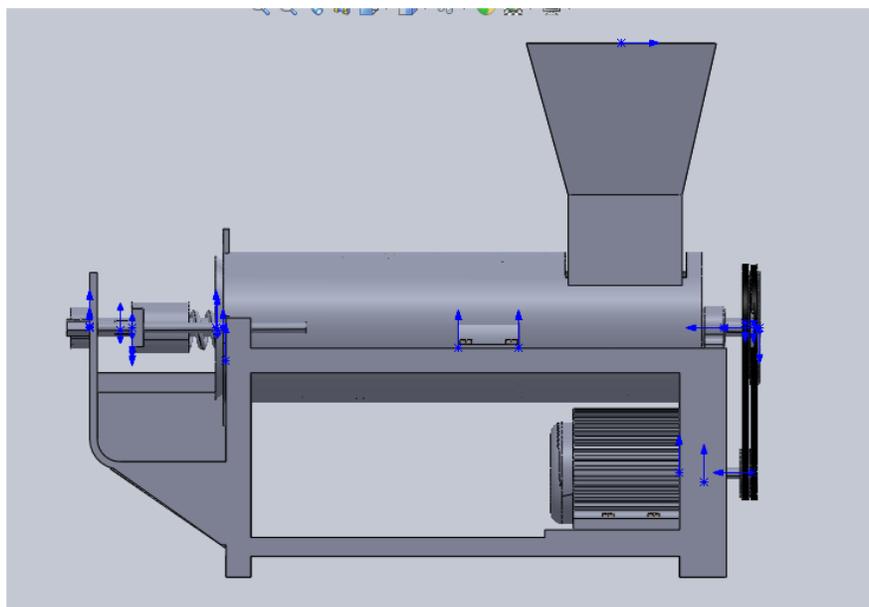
Side View of the Continuous Palm Oil Fruits Digesting Machine
